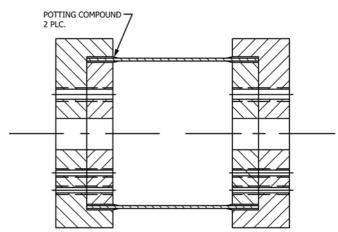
Illustration of the Assembled Compression Fixture and Specimen
